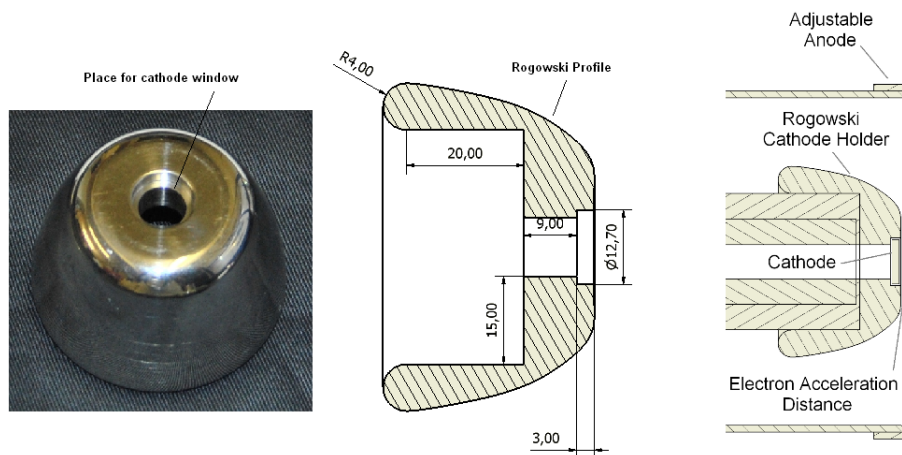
Machined Rogowski profiled cathode holder, dimensions and incorporation in electron gun.
